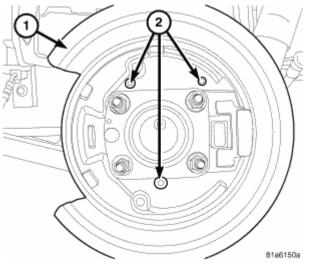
Identifying Support Plate & Attaching Bolts Courtesy of CHRYSLER LLC
